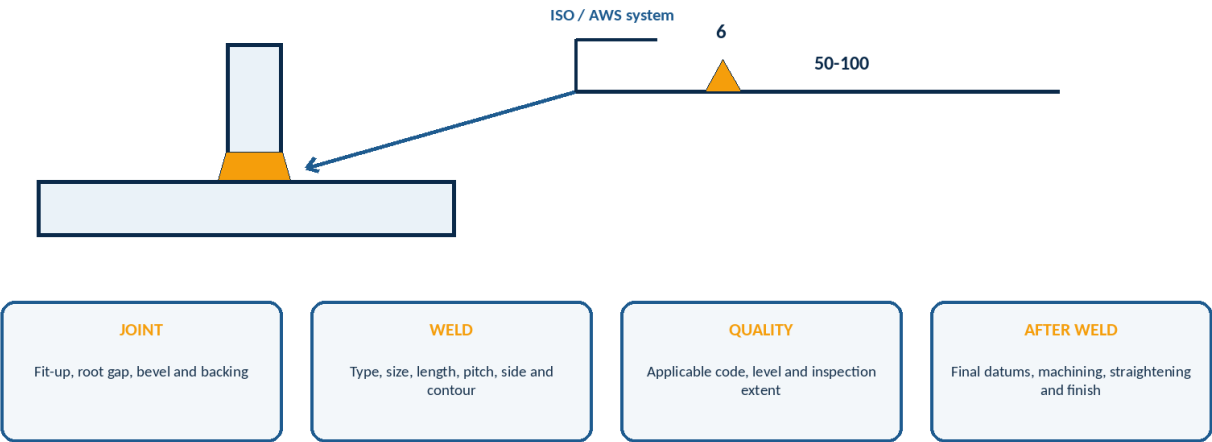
The symbol identifies the weld; joint geometry and acceptance still need to be defined.
